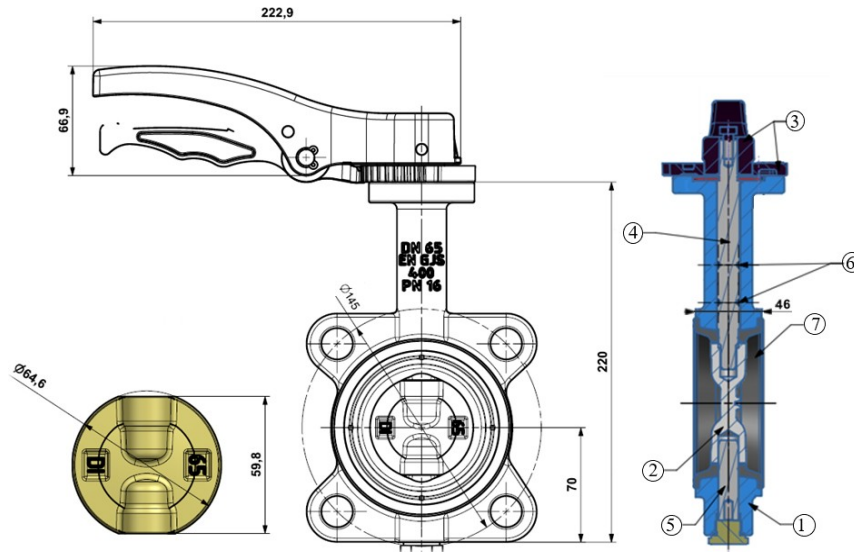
a) Front view and b) A-A section view of lug-type butterfly valve [11]
